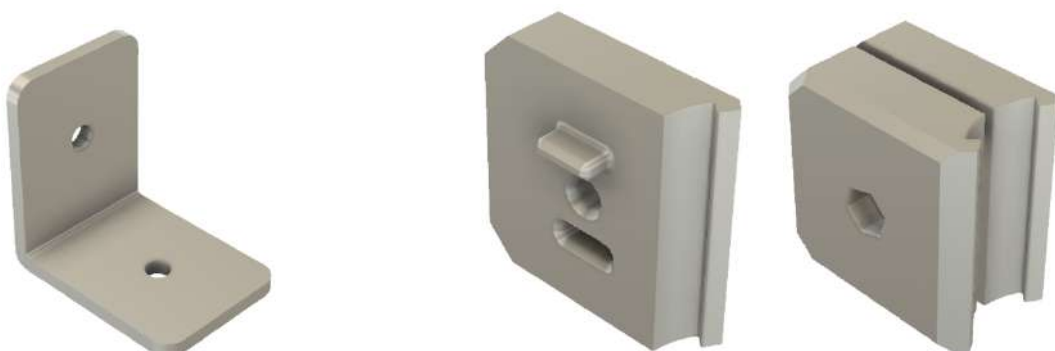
SUPPORT JOINTS FOR PANELS
